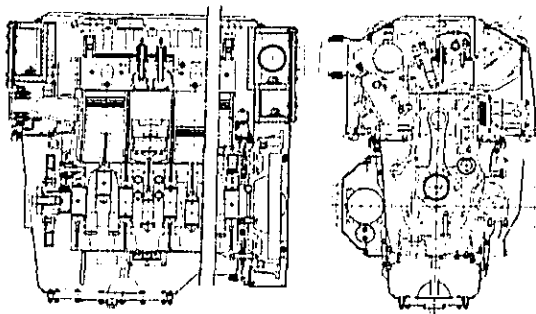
Sectional drawings of the prototype model of a low-noise water-cooled 6-cylinder inline diesel engine featuring an integrated oil sealing acoustic enclosure (9)
